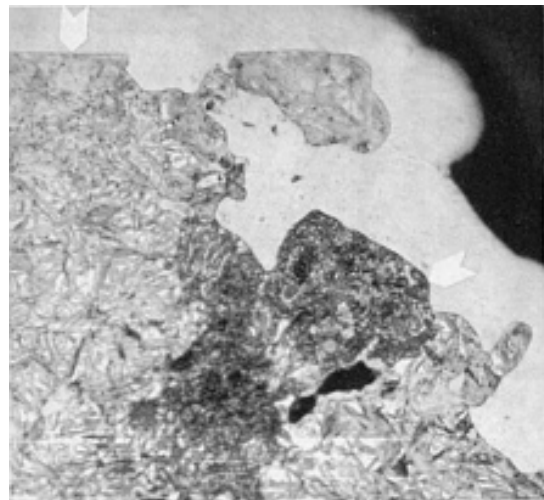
Fracture surface of a heat treated P/M steel where the fracture occurred in the unsintered state. Top arrow shows the compacted surface. Right arrow points to rounded particle surfaces with no indication of ductile cups and cones that would be typical of a fracture in the sintered state. White layer is electroless nickel plating used to preserve the surface details during polishing. Etched. Compare with Fig. 173. 960×
